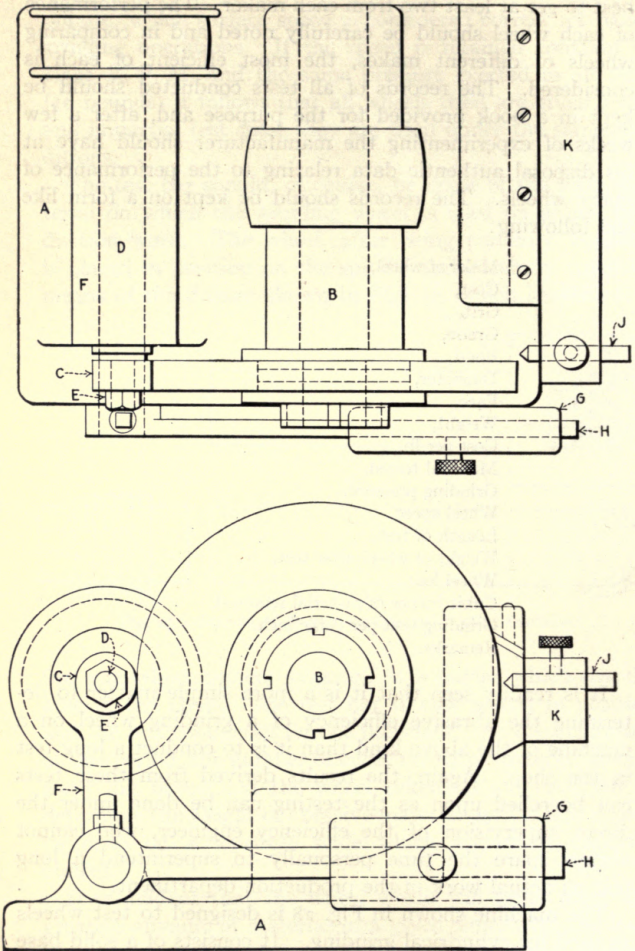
Laboratory grinding-wheel testing machine for testing grinding wheels used in cylindrical grinding operations.
